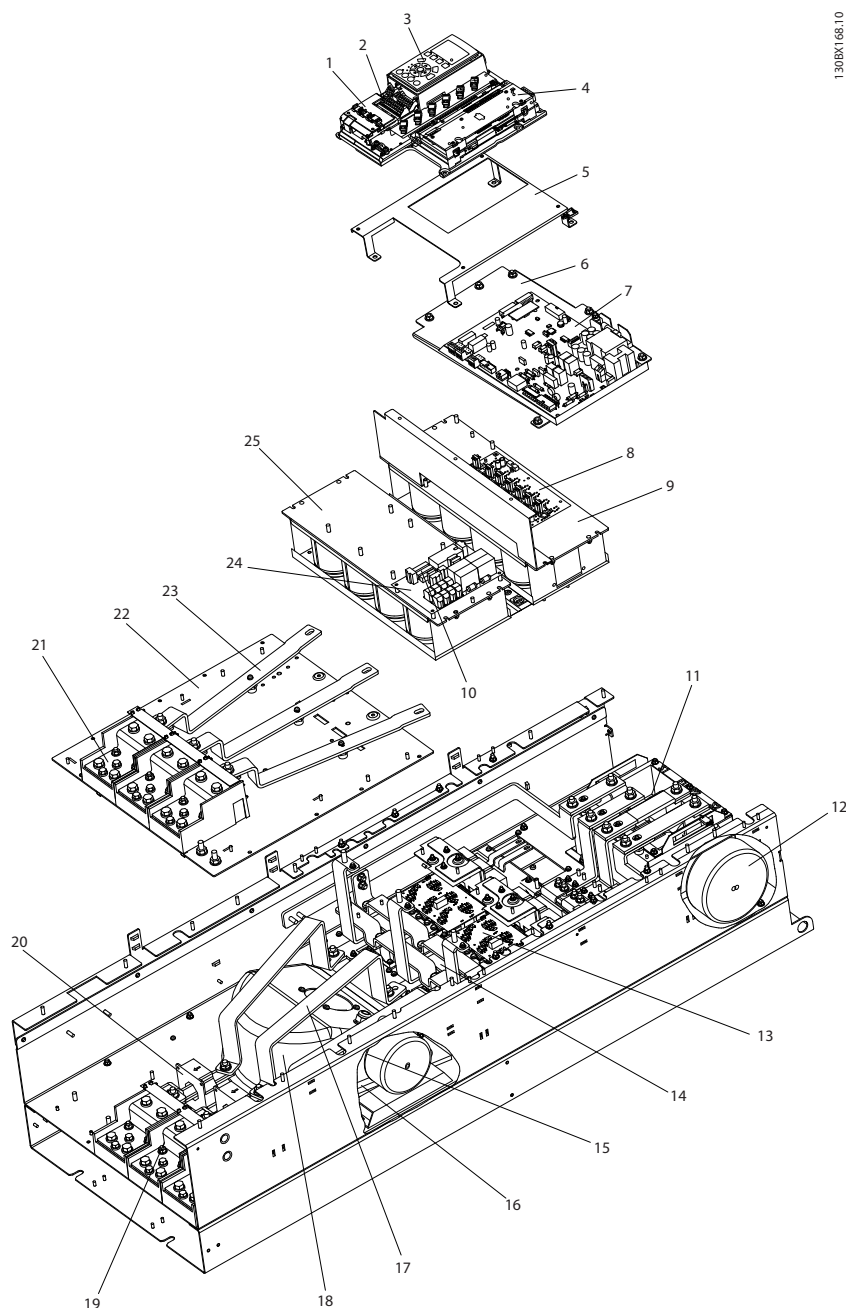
Enclosure Size D1n/D2n, Frequency Converter Enclosure
